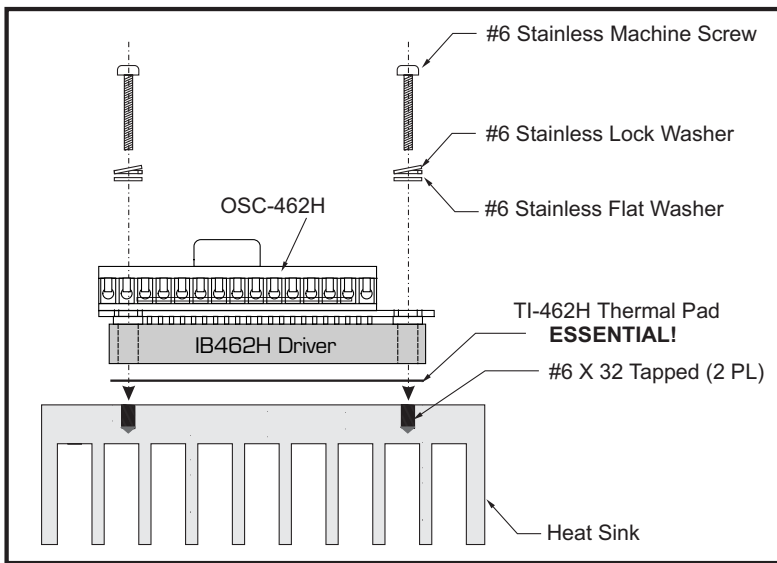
Mounting the IB462H/OSC-462H Assembly
